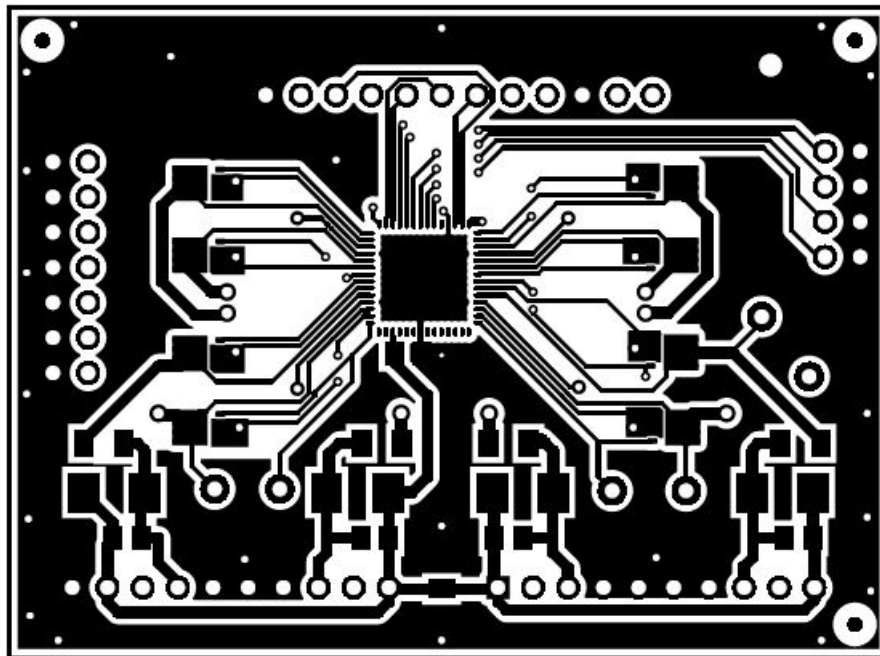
TPS23880EVM-008 (Daughterboard) Top Side Routing
